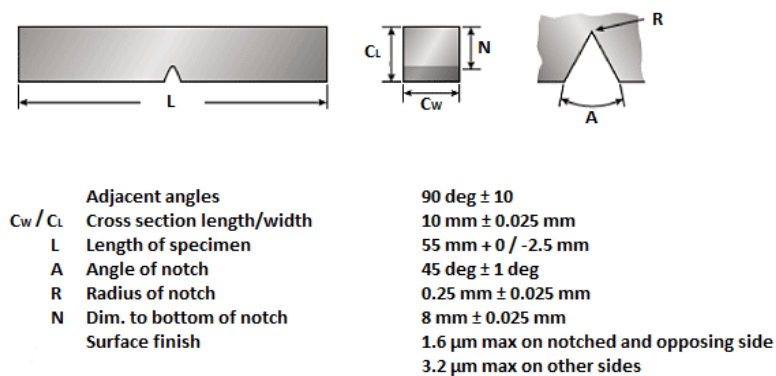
Measurements and tolerances of Charpy-V impact test specimens, machined according to standard (ASTM, 2014)
